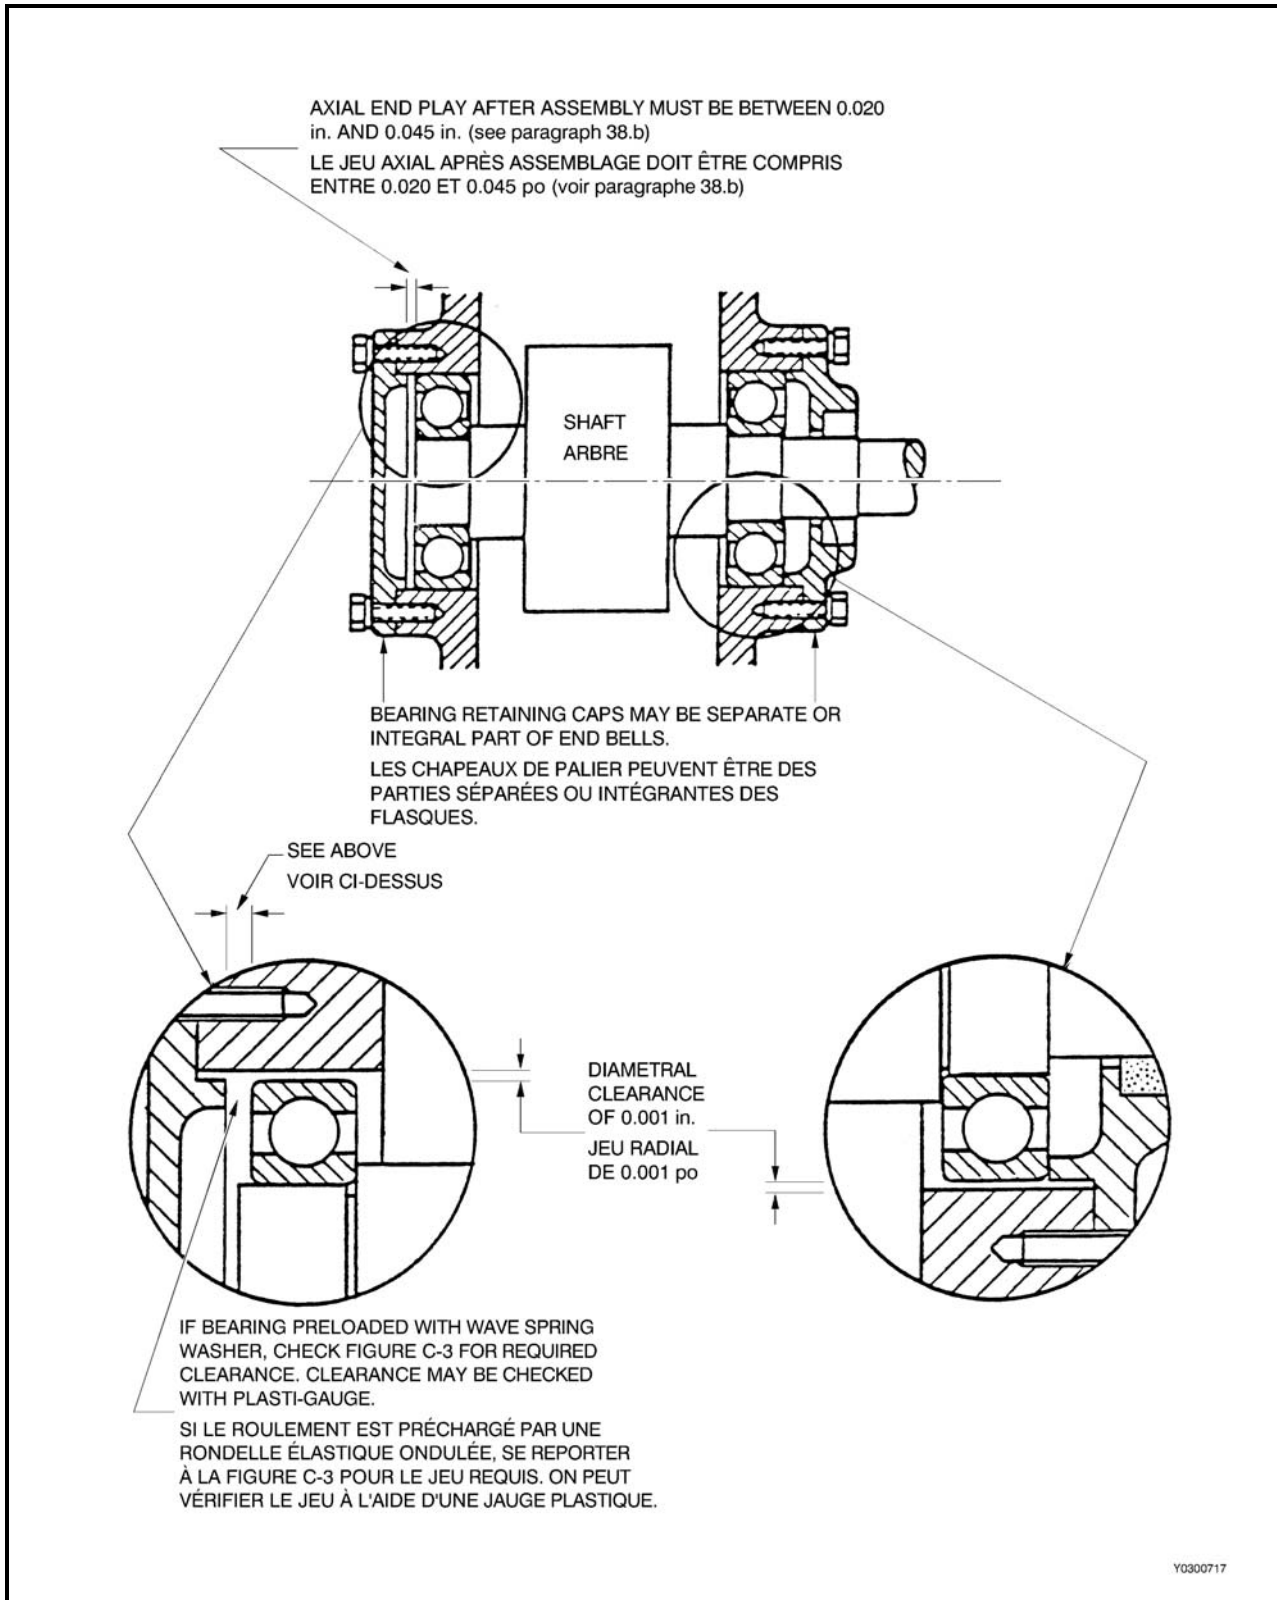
Opposed Shoulder Bearing Mounting Method with Ball Bearings
